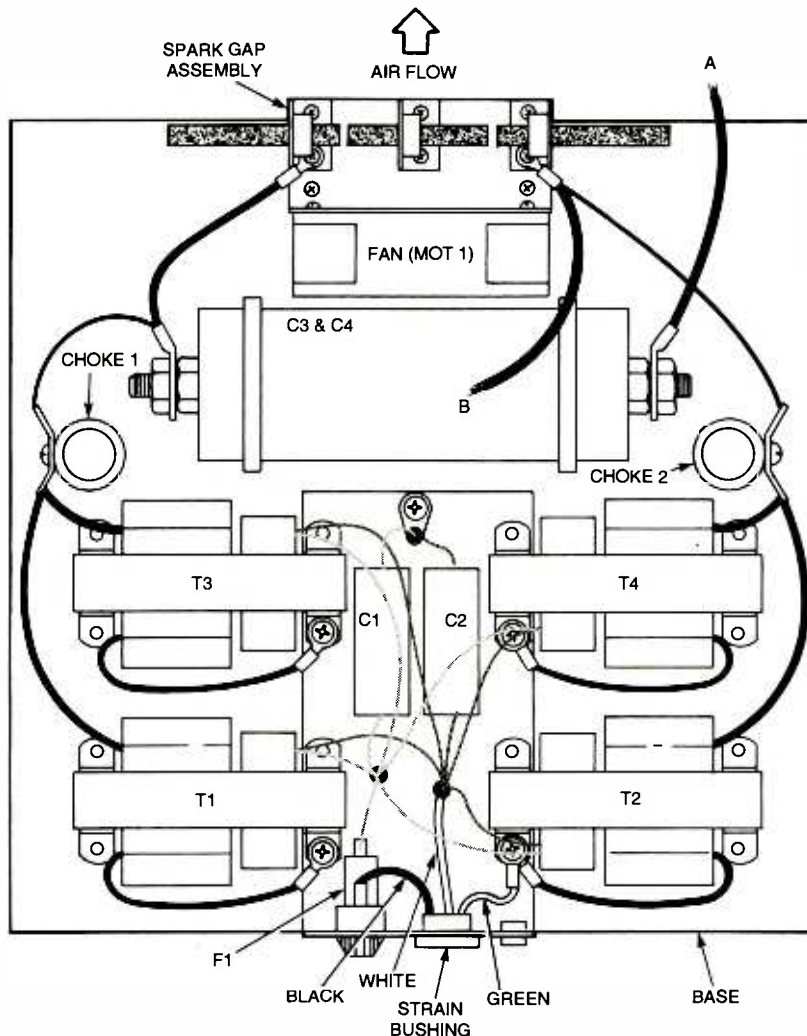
The base layout shows how the transformers, capacitors, and spark-gap assembly are mounted. Also shown is the high-voltage wiring. Follow this layout precisely.
